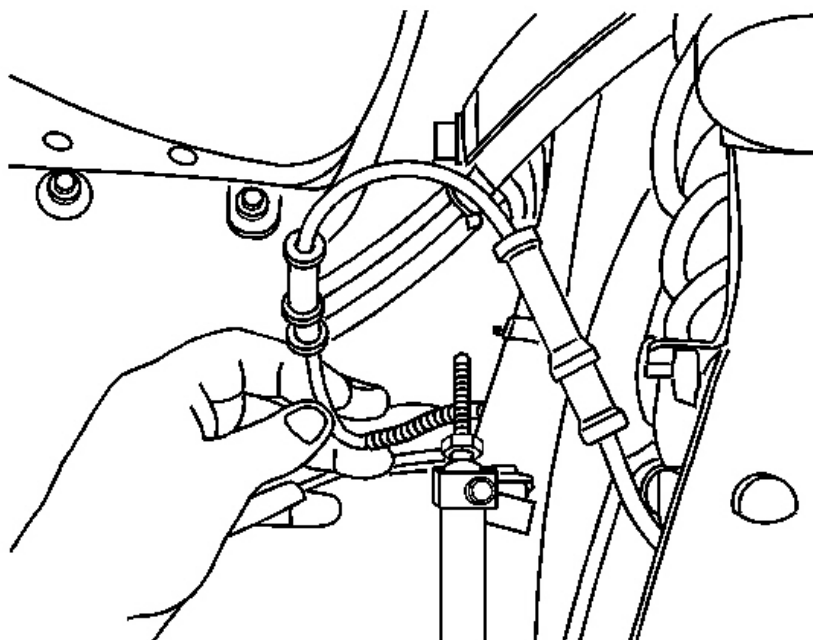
Identifying Wheel Speed Sensor Wiring Harness
